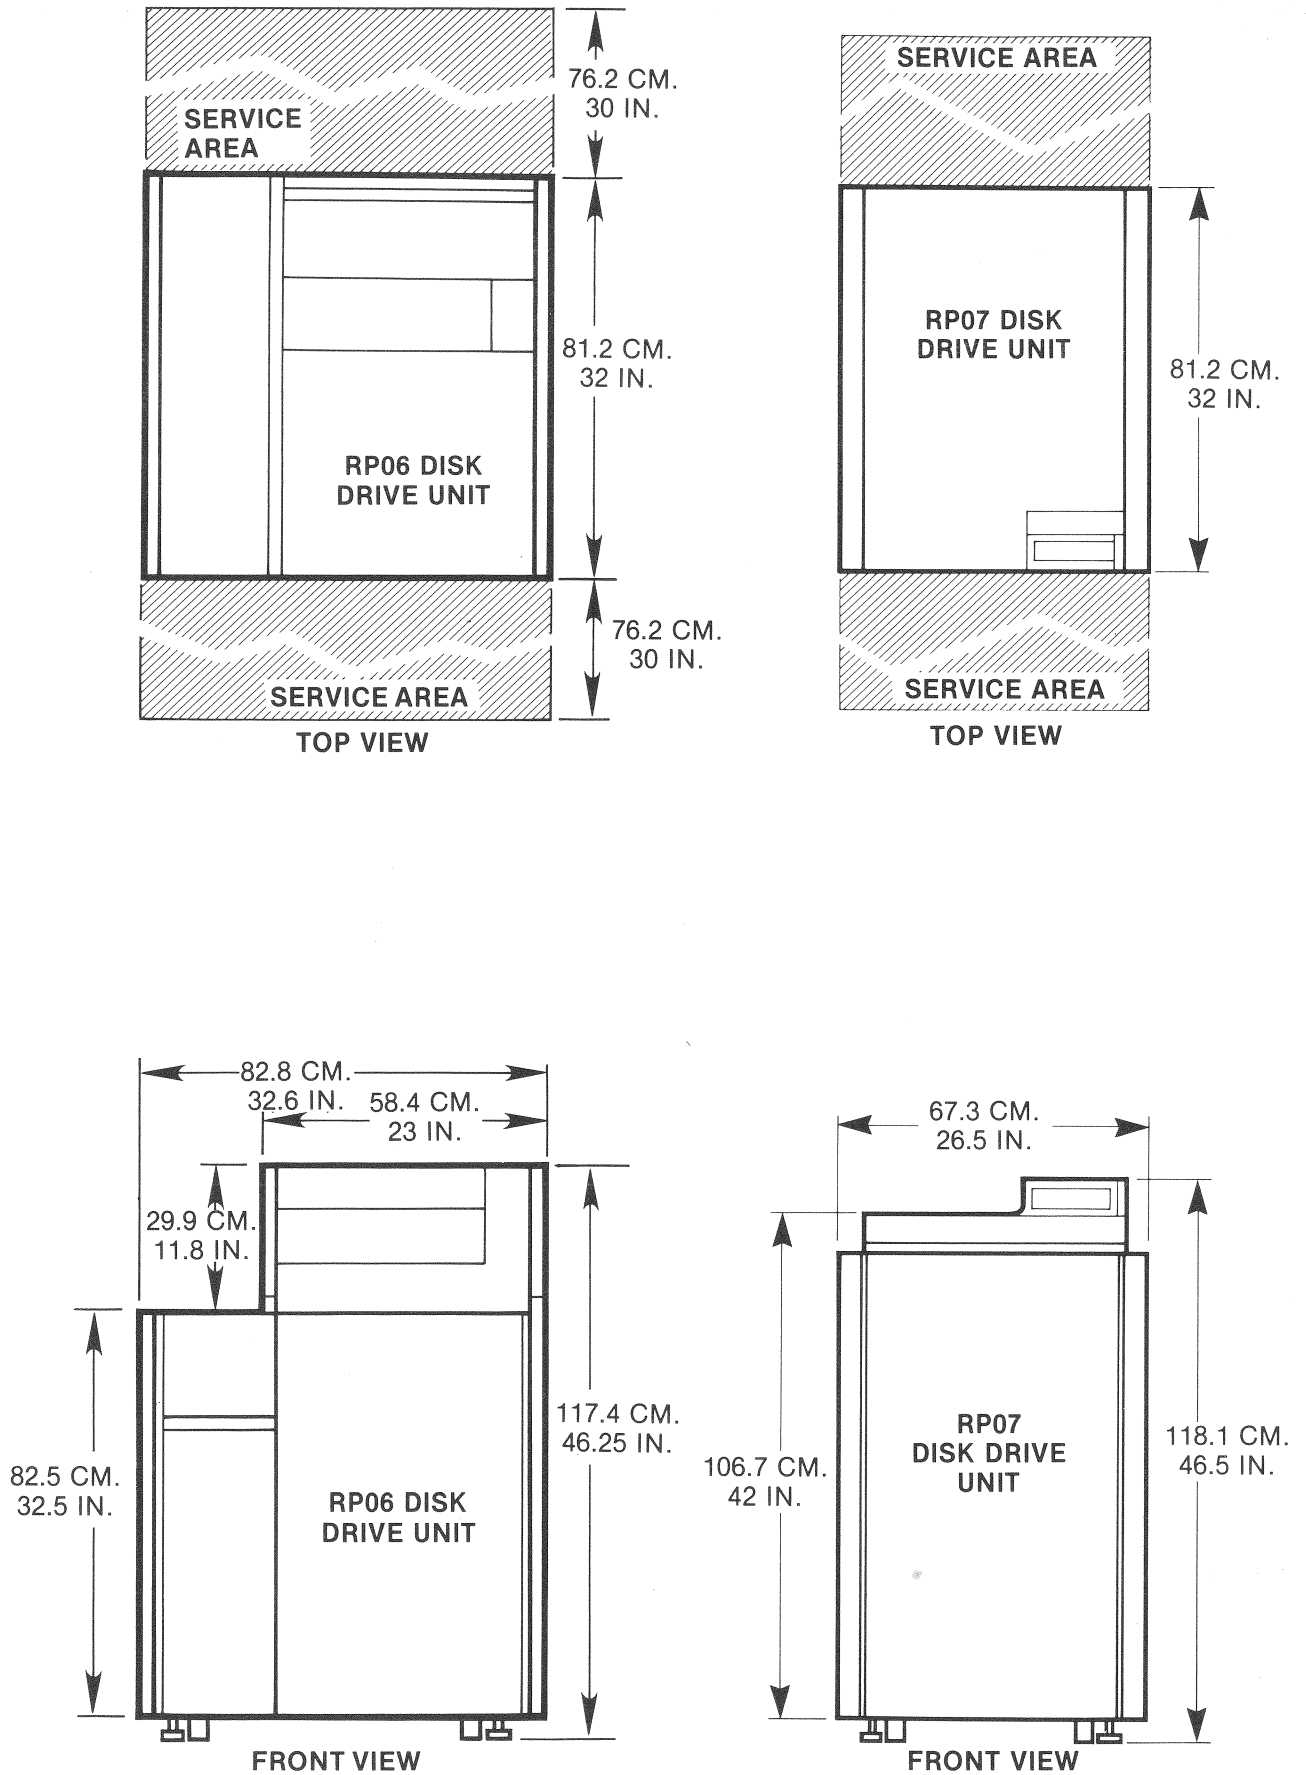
RP06 and RP07 Disk Drive Unit Dimensions
